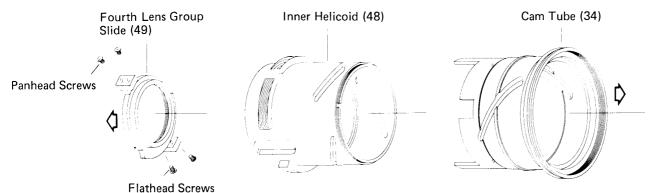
Fourth Lens Group Slide, Inner Helicoid, and Cam Tube
